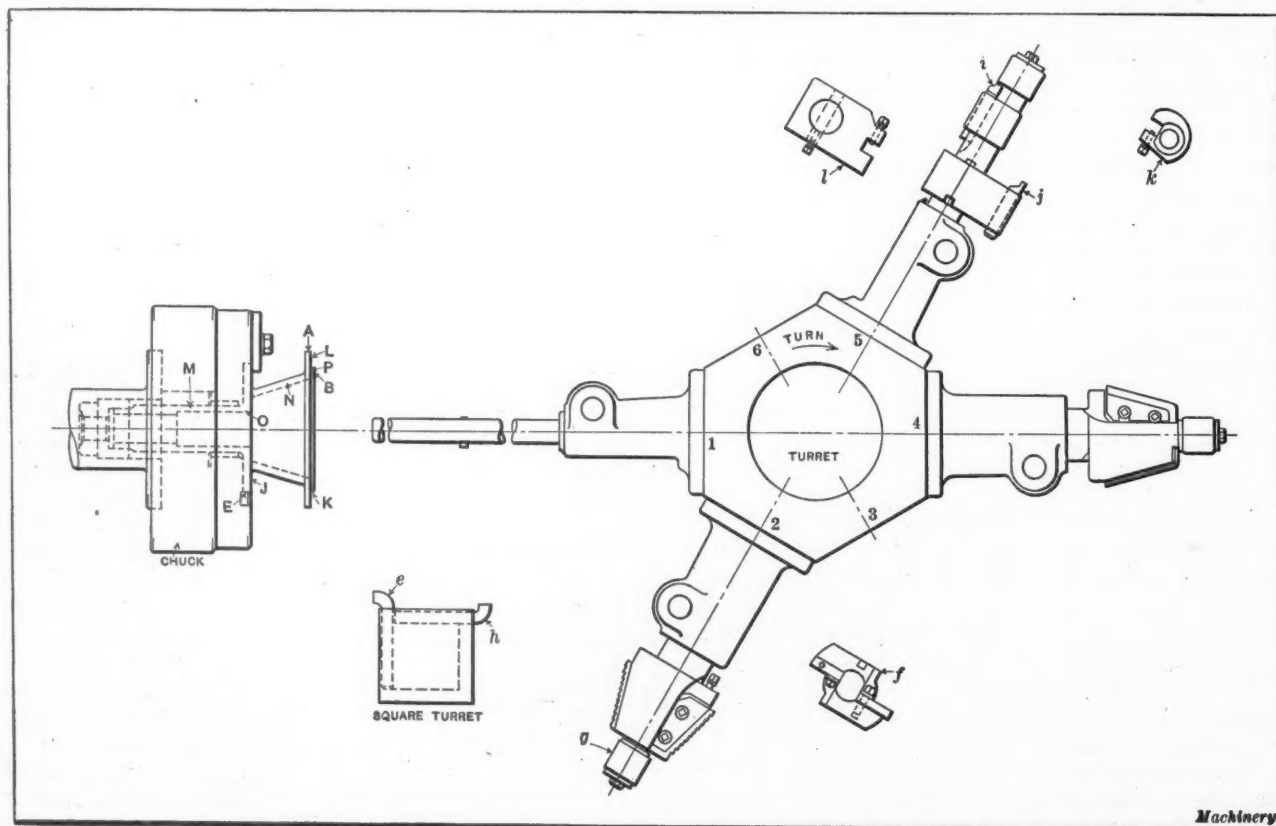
Tool Lay-out used in taking Roughing Cuts on the Flange End of the Airplane Engine Part
